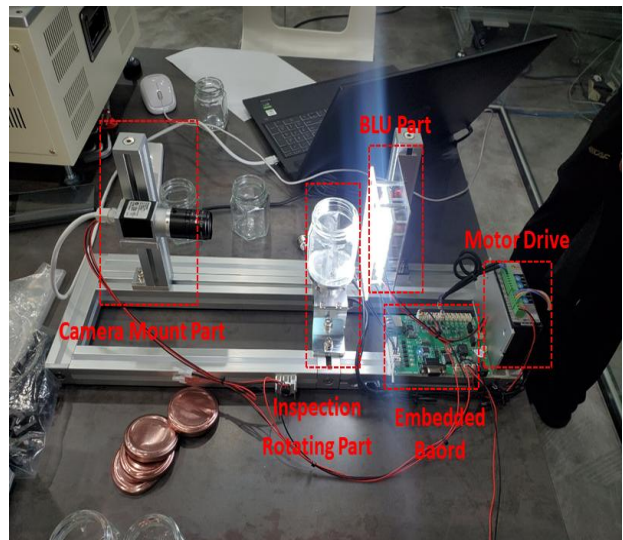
Apparatus for Machine Vision Inspection of Polygonal Containers.
